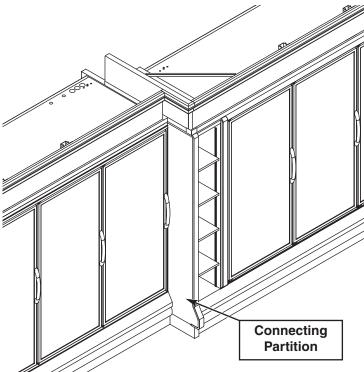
Merchandisers Joined with Bump Out and Dry Goods Cabinet
